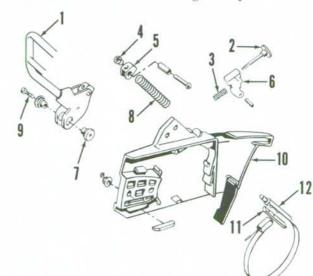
Exploded view of chain brake assembly used Models 298XP and 2101XP.
